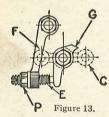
Shows the push finger "G" and movable electrode adjusting screw "E" that controls the position of the igniter points on the inside of the engine. This screw must be kept in proper adjustment, as explained at the top of page 31, so as to take up any wear on the push finger or the igniter parts.
